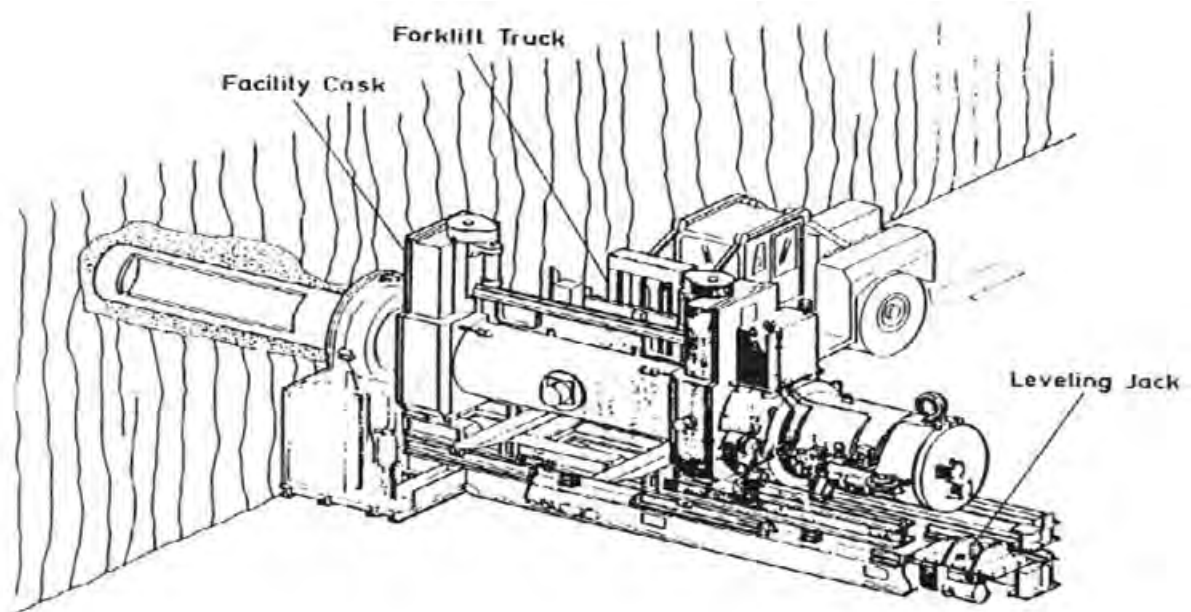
Waste Transfer Machine Assembly Installed on the Alignment Fixture
